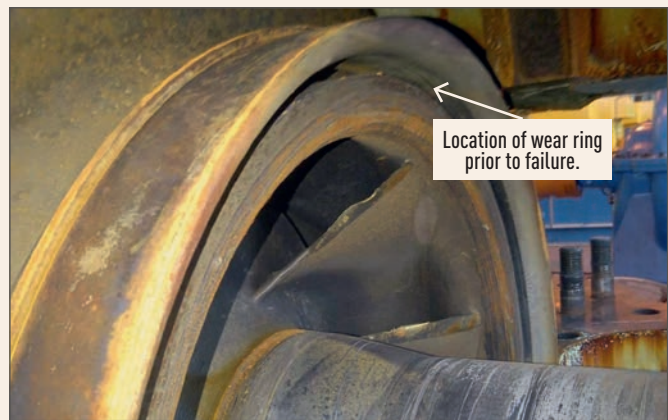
Partially dismantled failed pump showing the location where the impeller wear ring had been installed.
